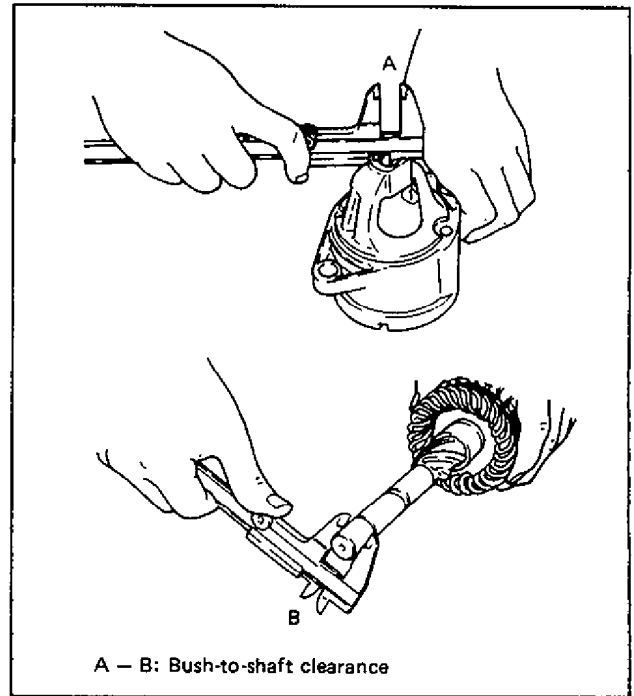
G-27 Measuring Bush-to-Shaft Clearance
